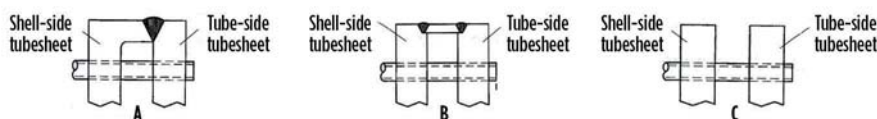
Integral (A), connected (B) and separate (C) double-tubesheet type constructions.
